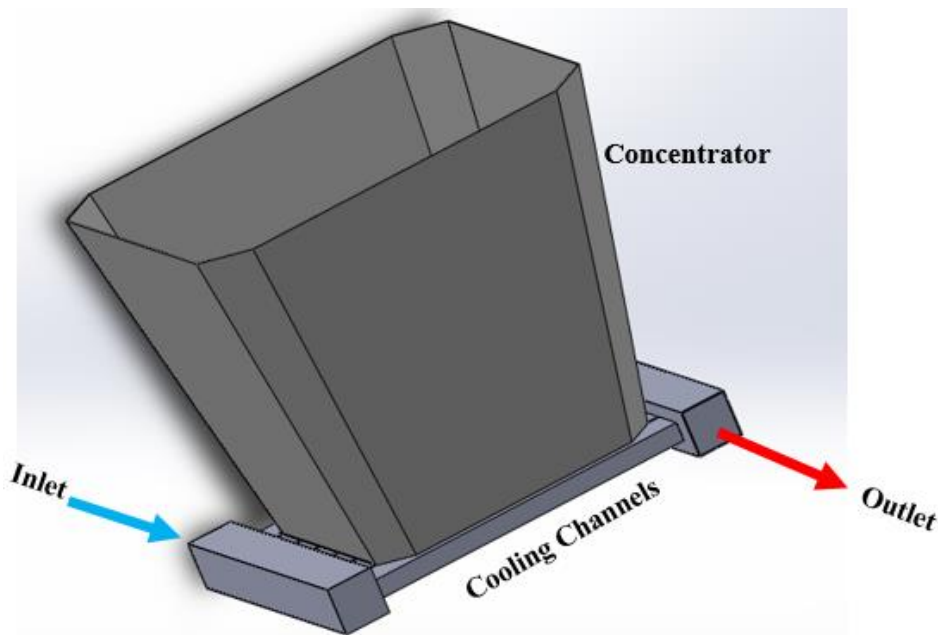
3D-CAD drawing of the 3D-PSCPV with cooling channels
